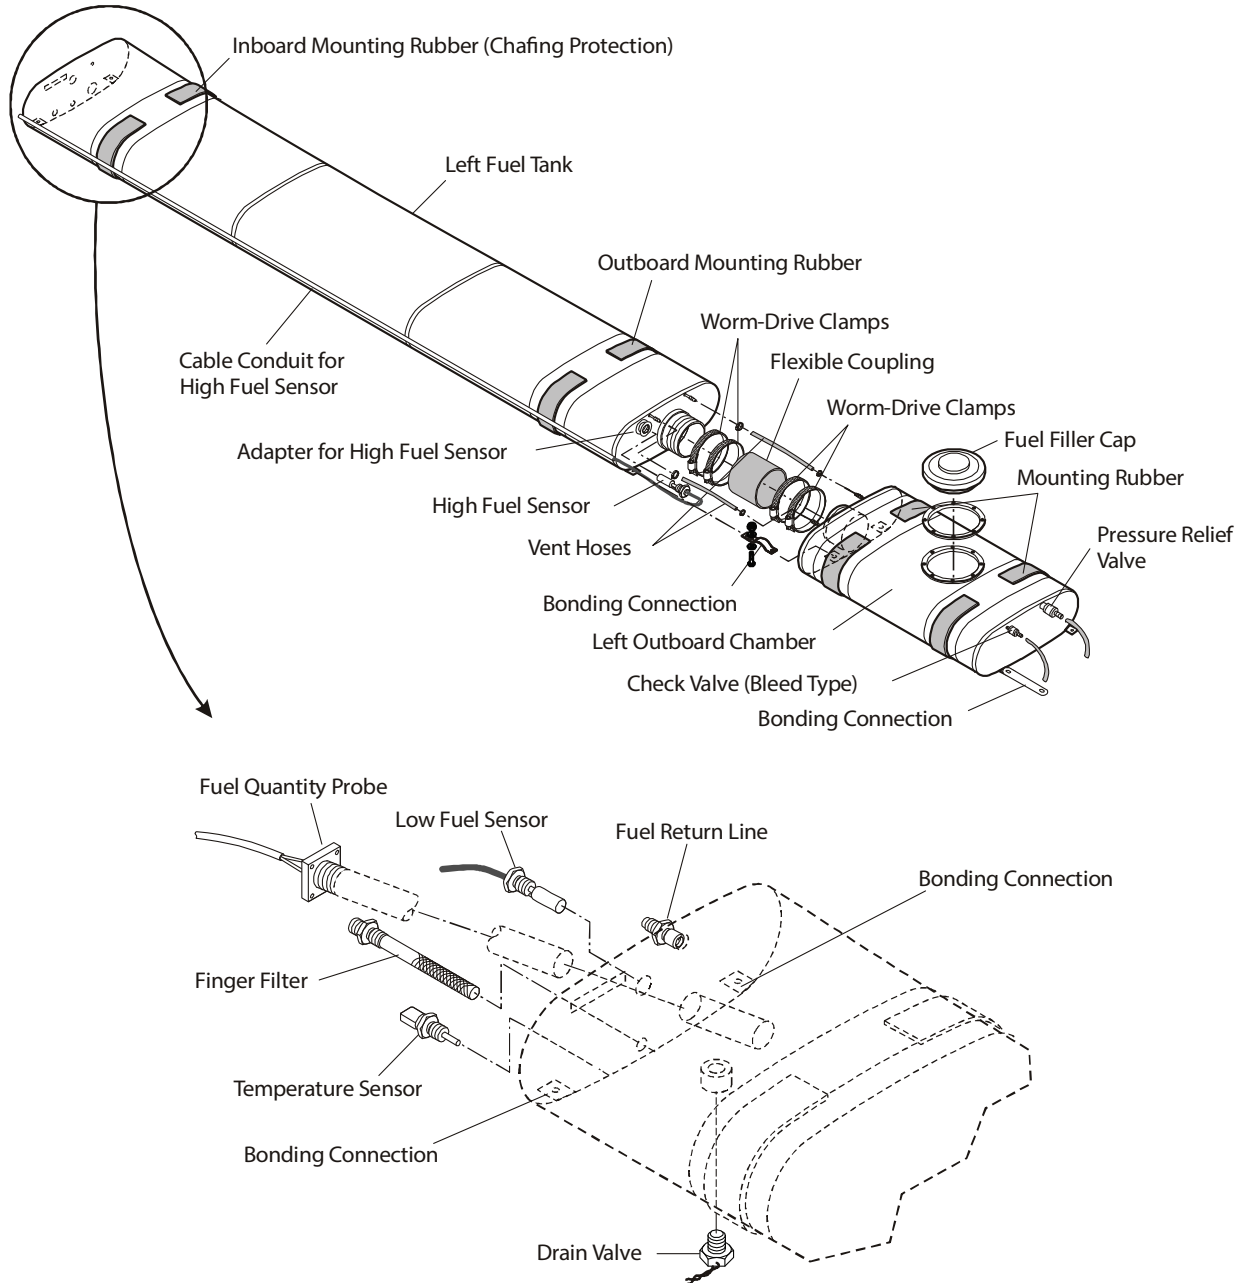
Left Hand Long Range Tank Installation (if OÄM 40-130 is installed)
